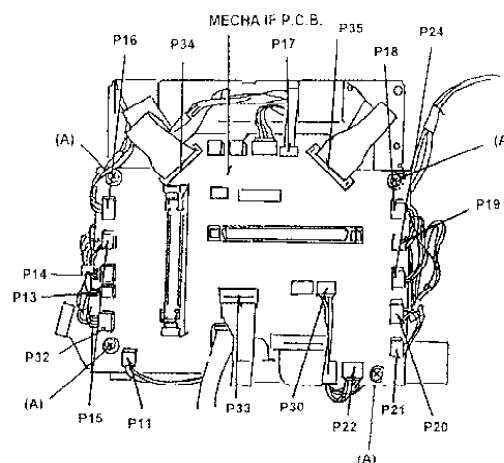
Connection of S & T Reel Rotor Unit
